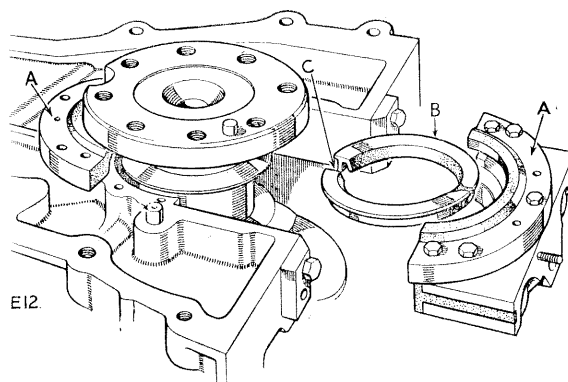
Rear crankshaft oil seals—2-piece type
